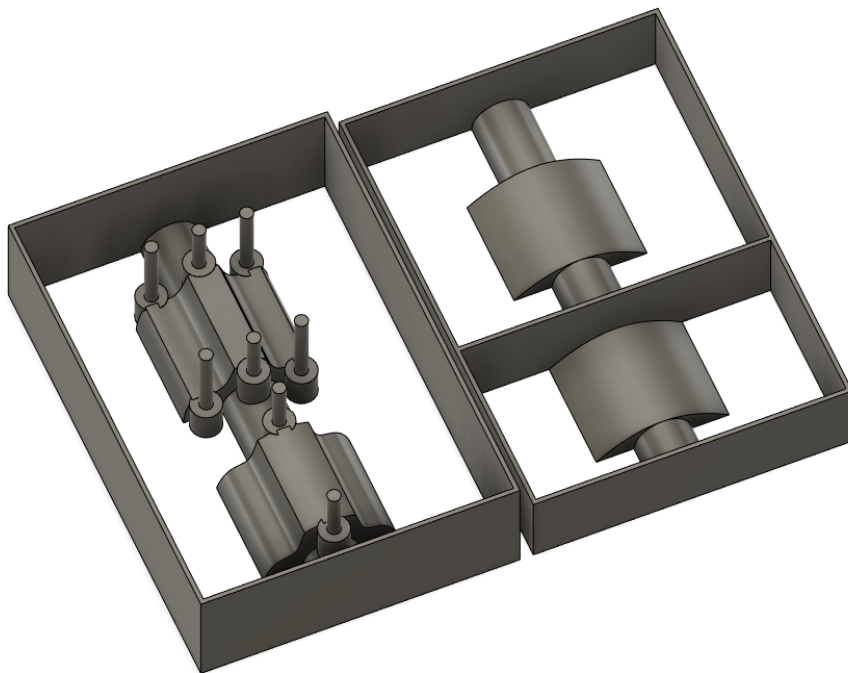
The 3D printed moulds for casting the refractory cement in the shape of the tube furnace. Left is the bottom half, and right is the top half.
